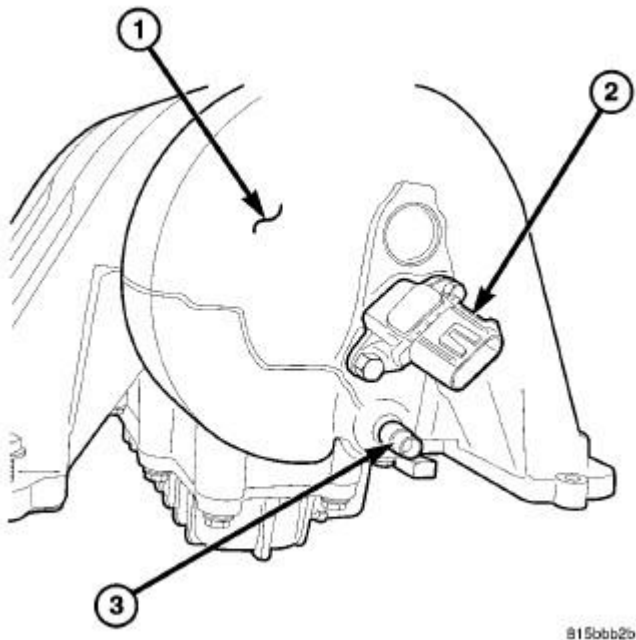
Locating Manifold Air Pressure MAP Sensor - 6.1L
